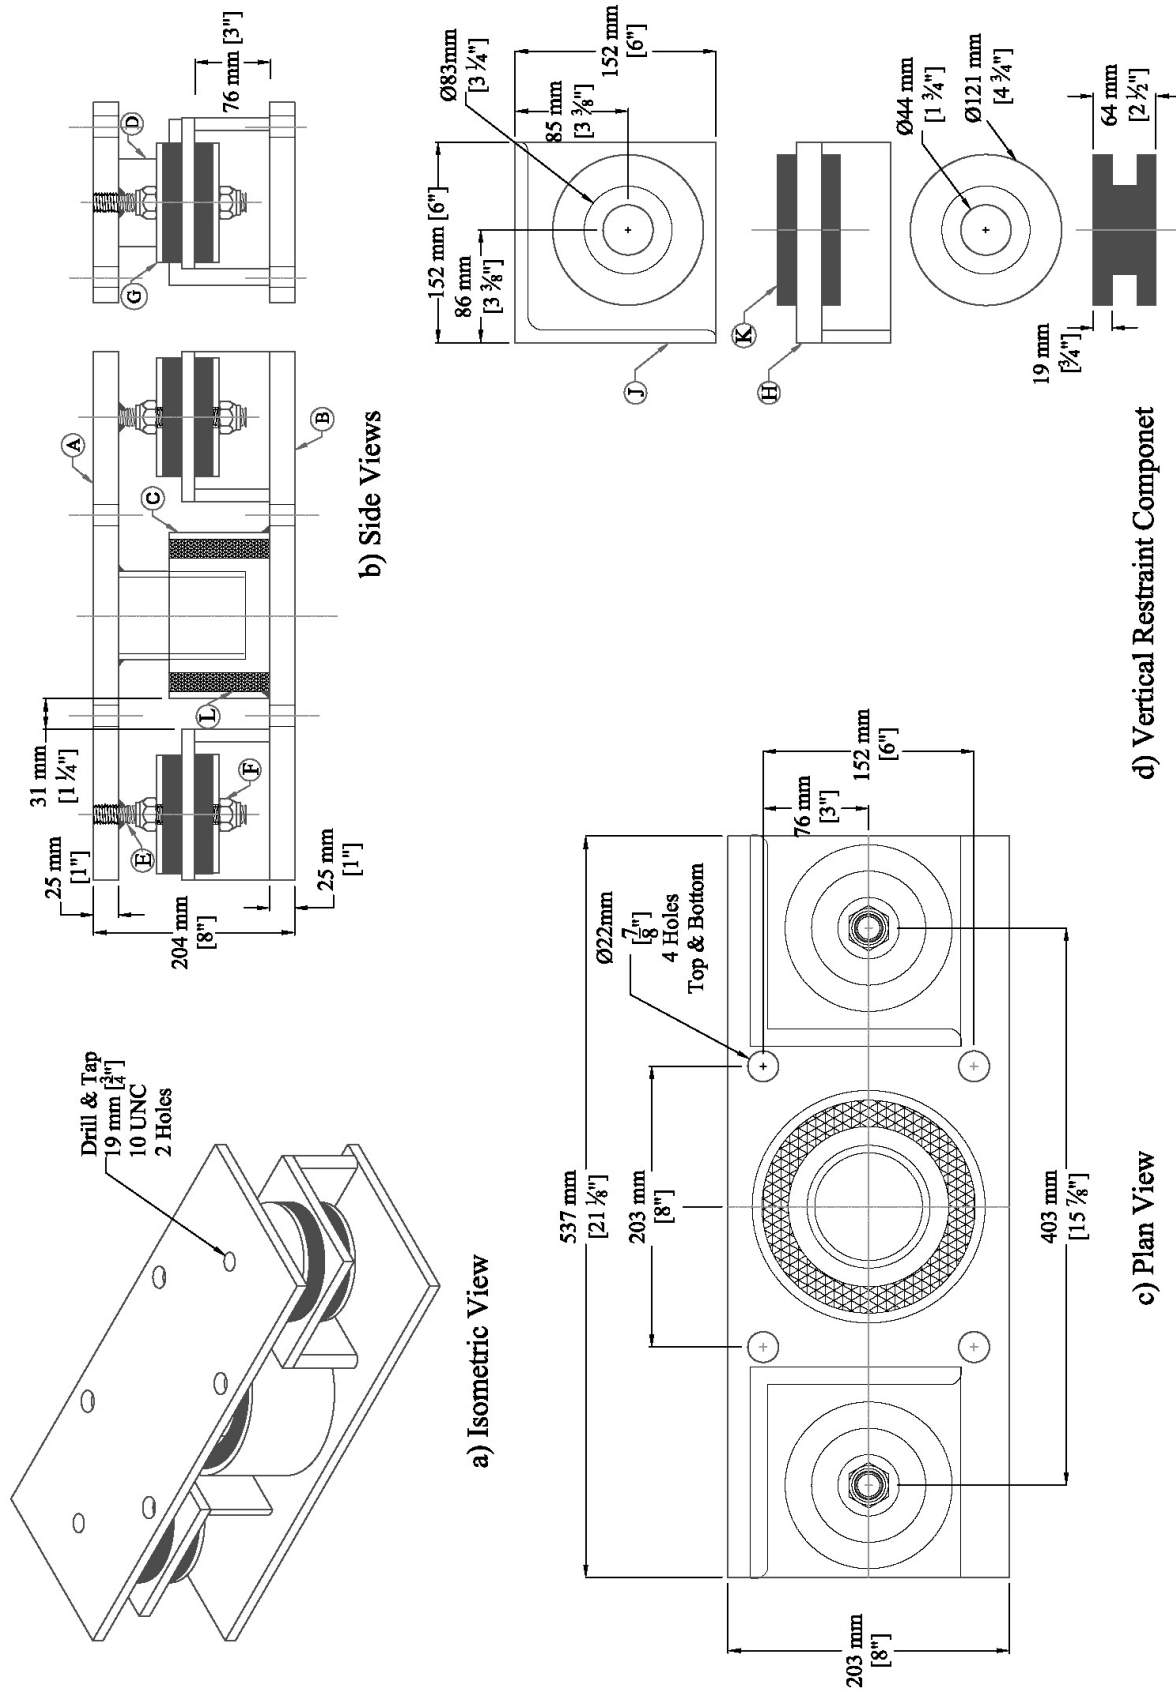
Dimensions and Details of 1.0 g Design Restraint Component (units: mm [in])
